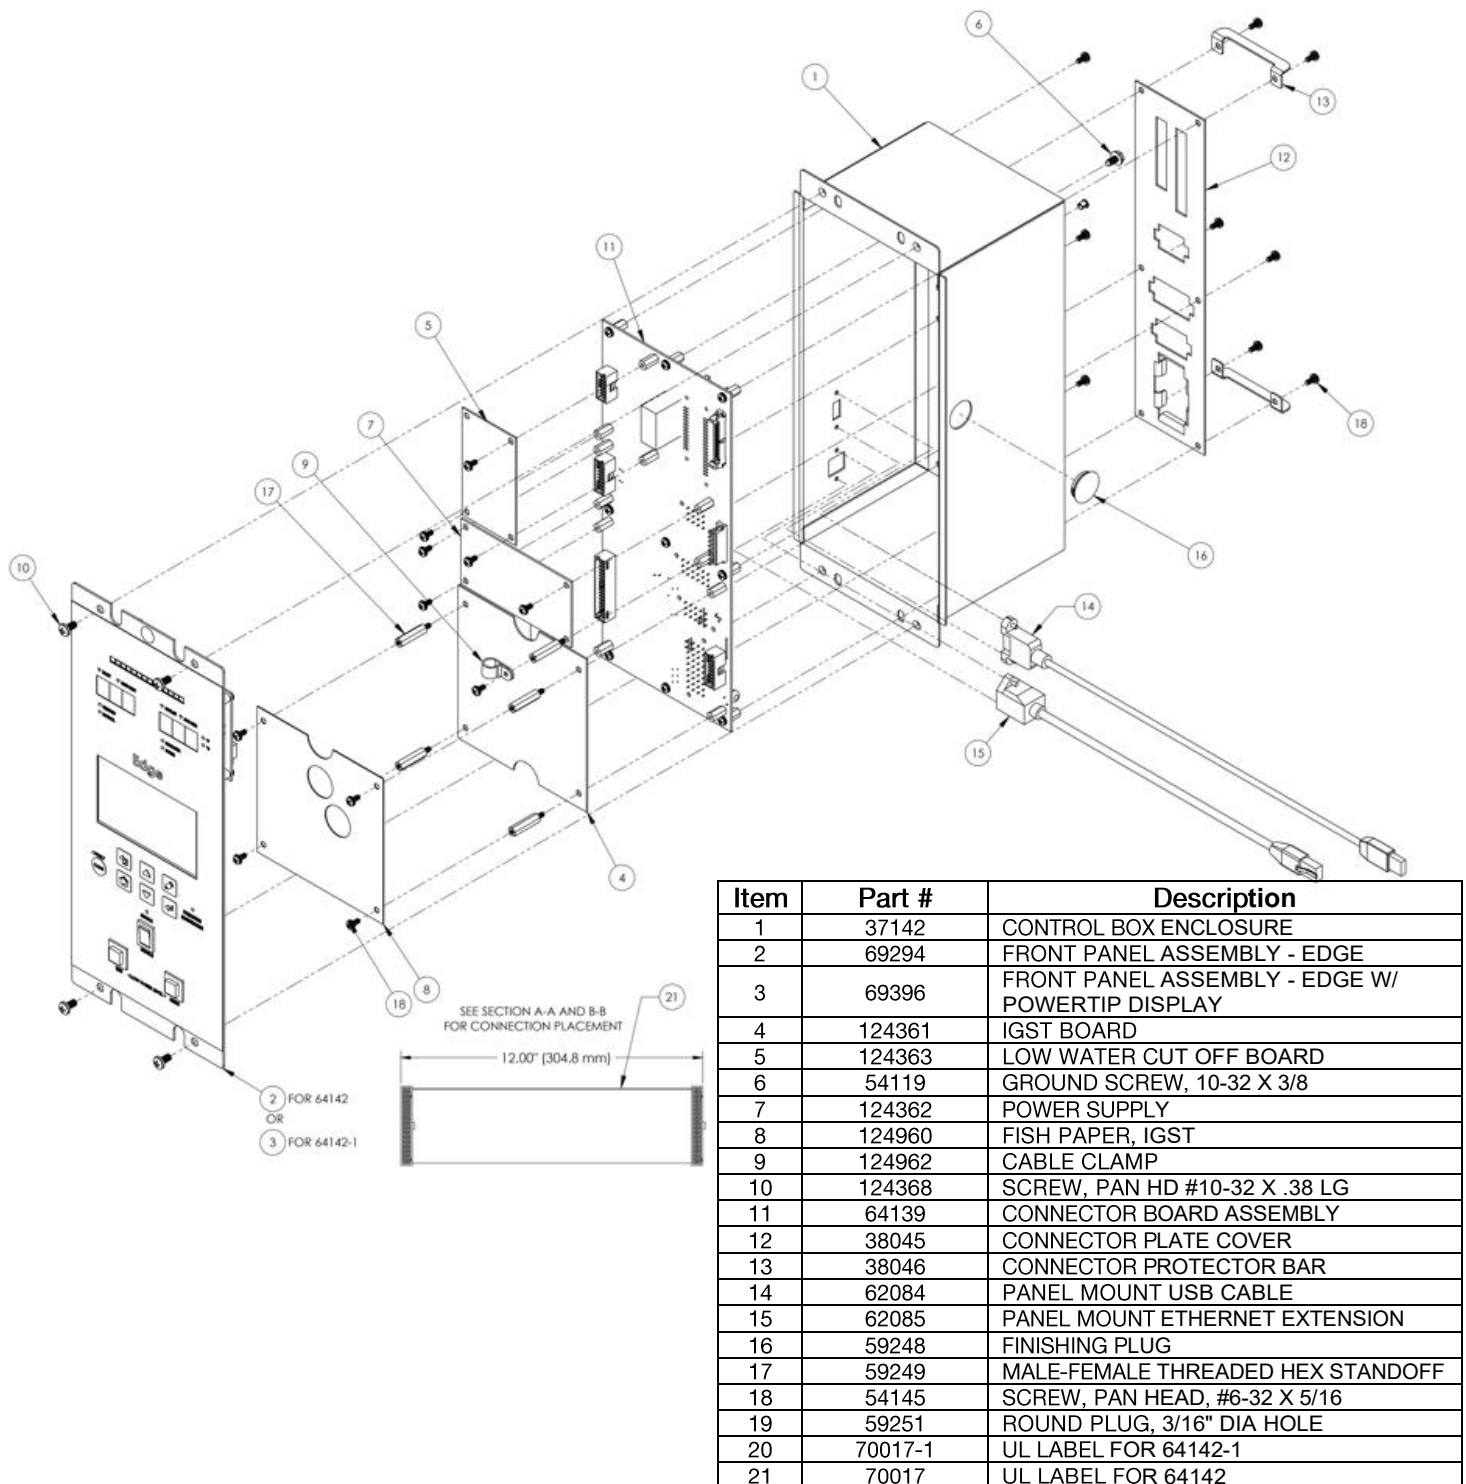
Edge [ii] Controller (P/N 69344-1) - Exploded View
